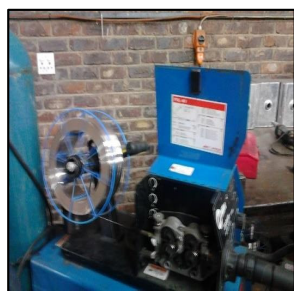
Miller CP- 300 model MIG welding machine setup
